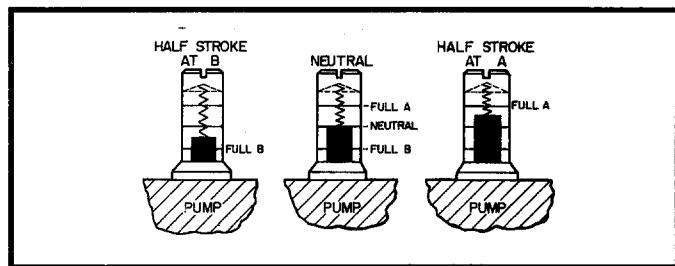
Stroke indicator positions for a unit driven (rotated) clockwise (when facing driveshaft) and with bias control on left side of the pump. (509464 sh. 2).
